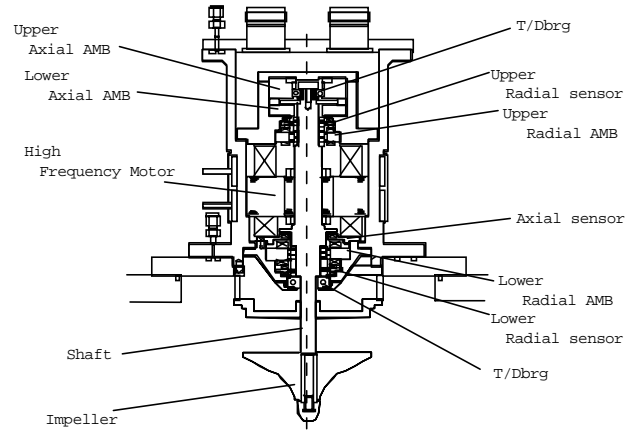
Crossection of Helium Cold Compressor 18gr/sec
